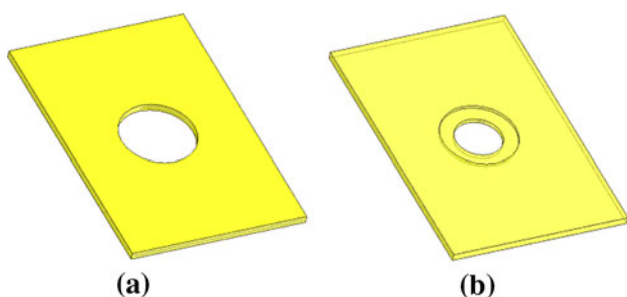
PMMA large hole valve seat. a The original valve seat, b step hole valve seat
